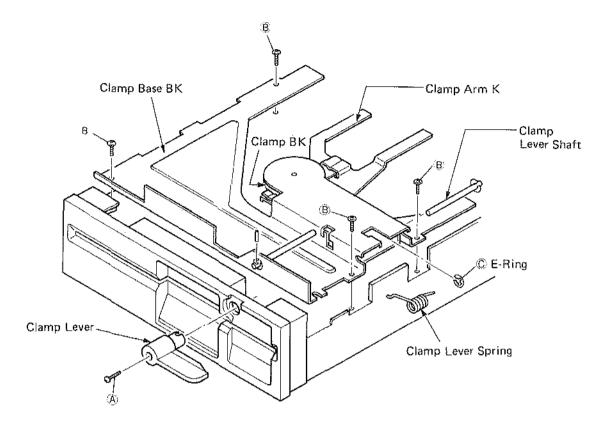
Clamp Base BK and Clamp Arm K Removals
